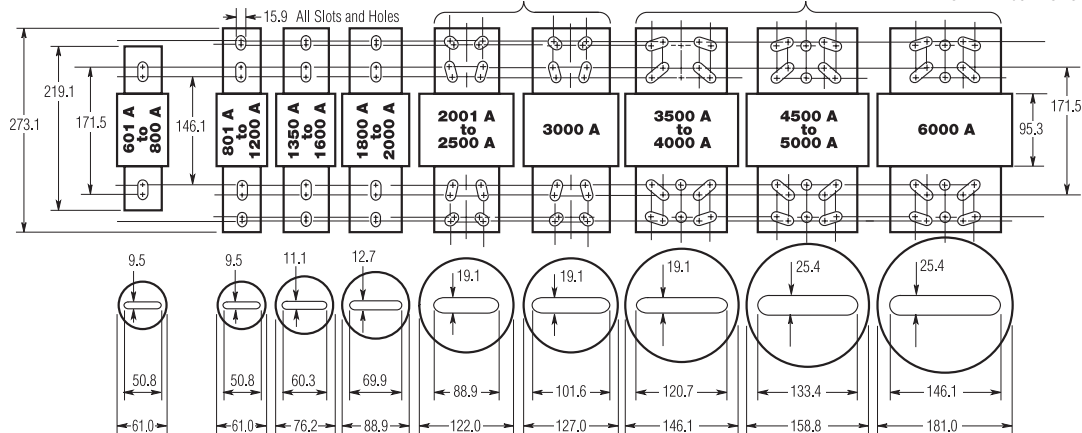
Typical Fuse Dimensions in Millimeters
